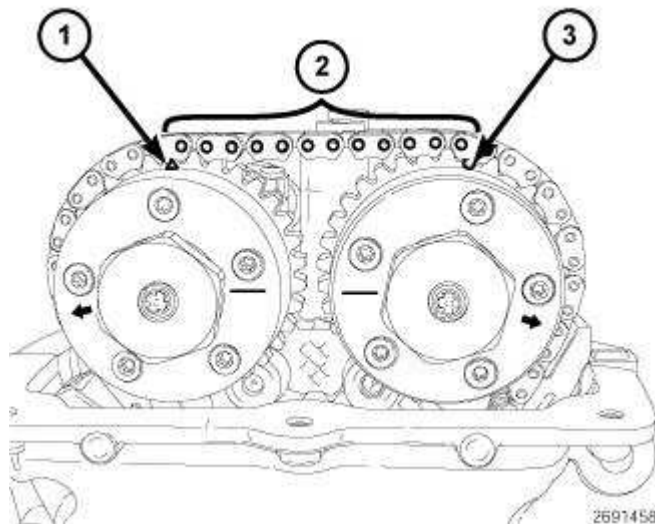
Chain Pins, Arrows, Scribe Lines, Cam Phaser Triangle Marking & Circle Marking
